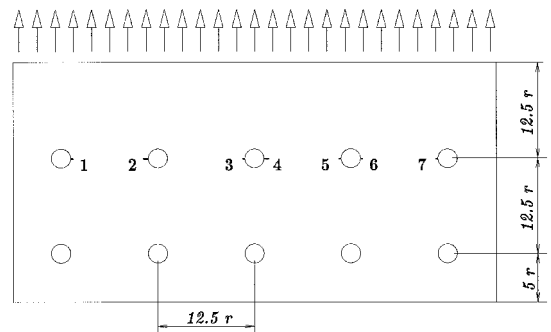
Multiple site damage problem in fuselage lap joint splice.
